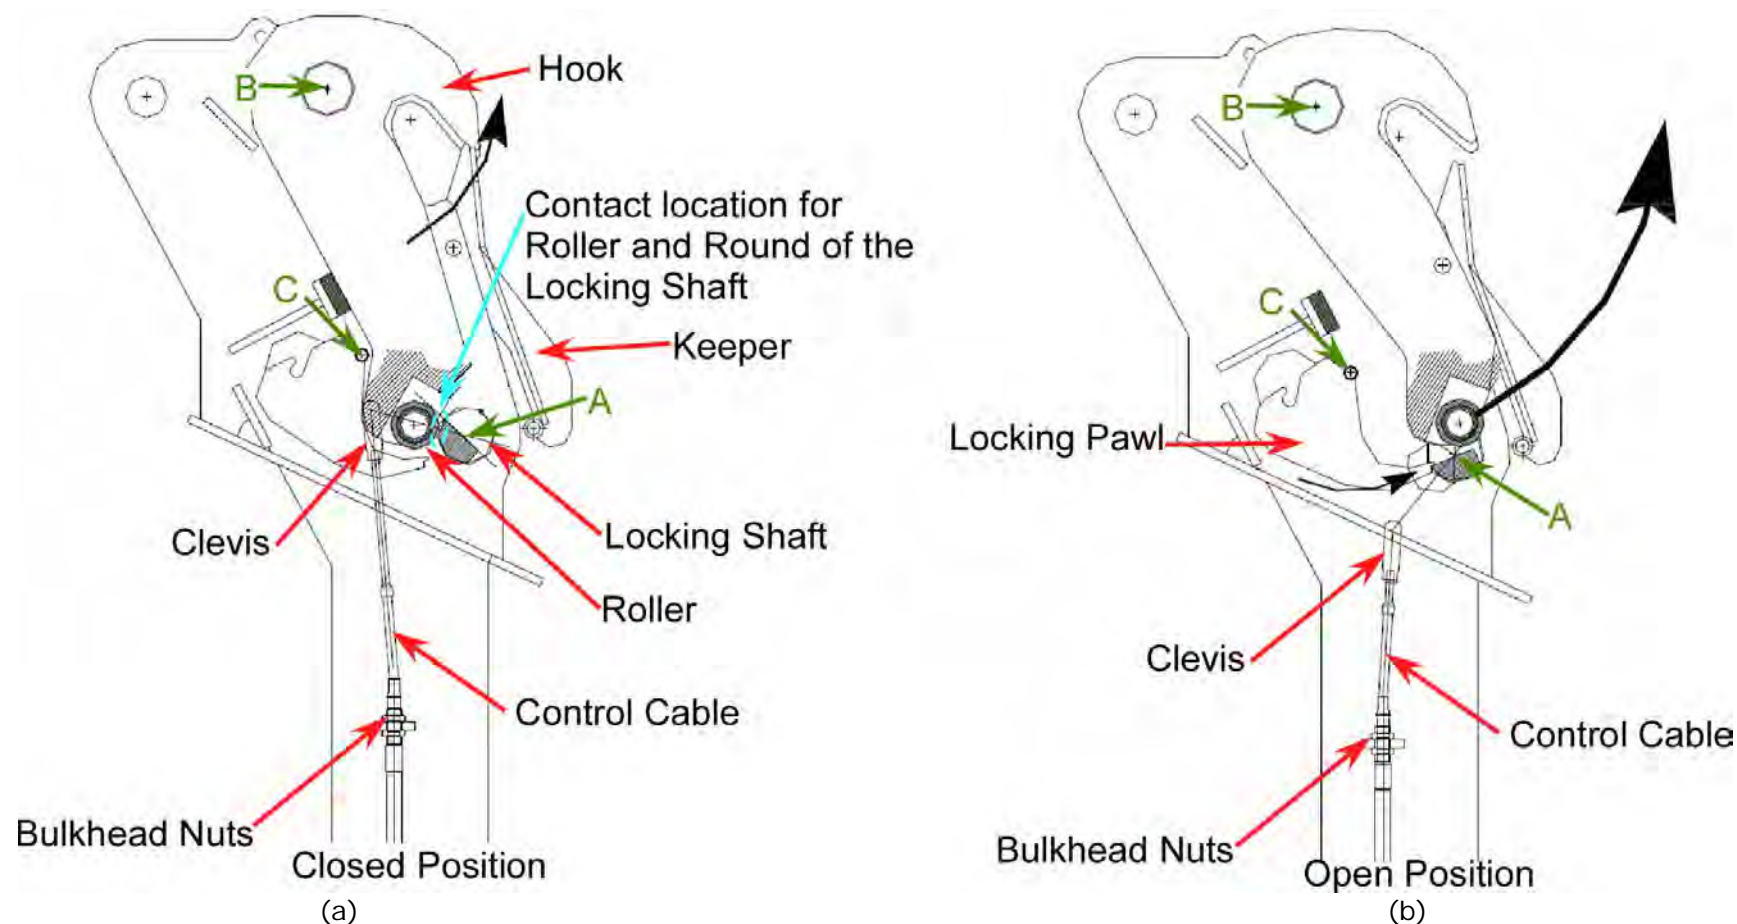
Drawings from Palfinger Document F10927 showing a cross-sectional view of the LHR3.5M2 hook when in the (a) closed position and (b) open position. The location of the clevis, bulkhead nuts, control cable, hook roller, locking shaft, keeper, and locking pawl of the hook are shown. Drawings provided by Palfinger to SOI. Note that the drawings shown is for a hook of similar design and not the as-installed hooks.
